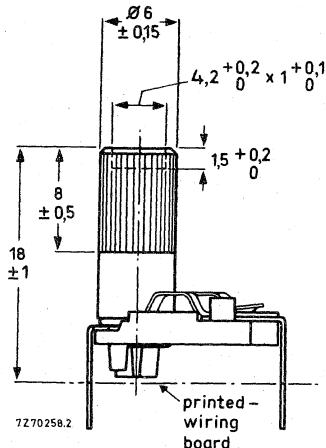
Test switch for horizontal mounting with adjustment knob at the side of the selector contact.
